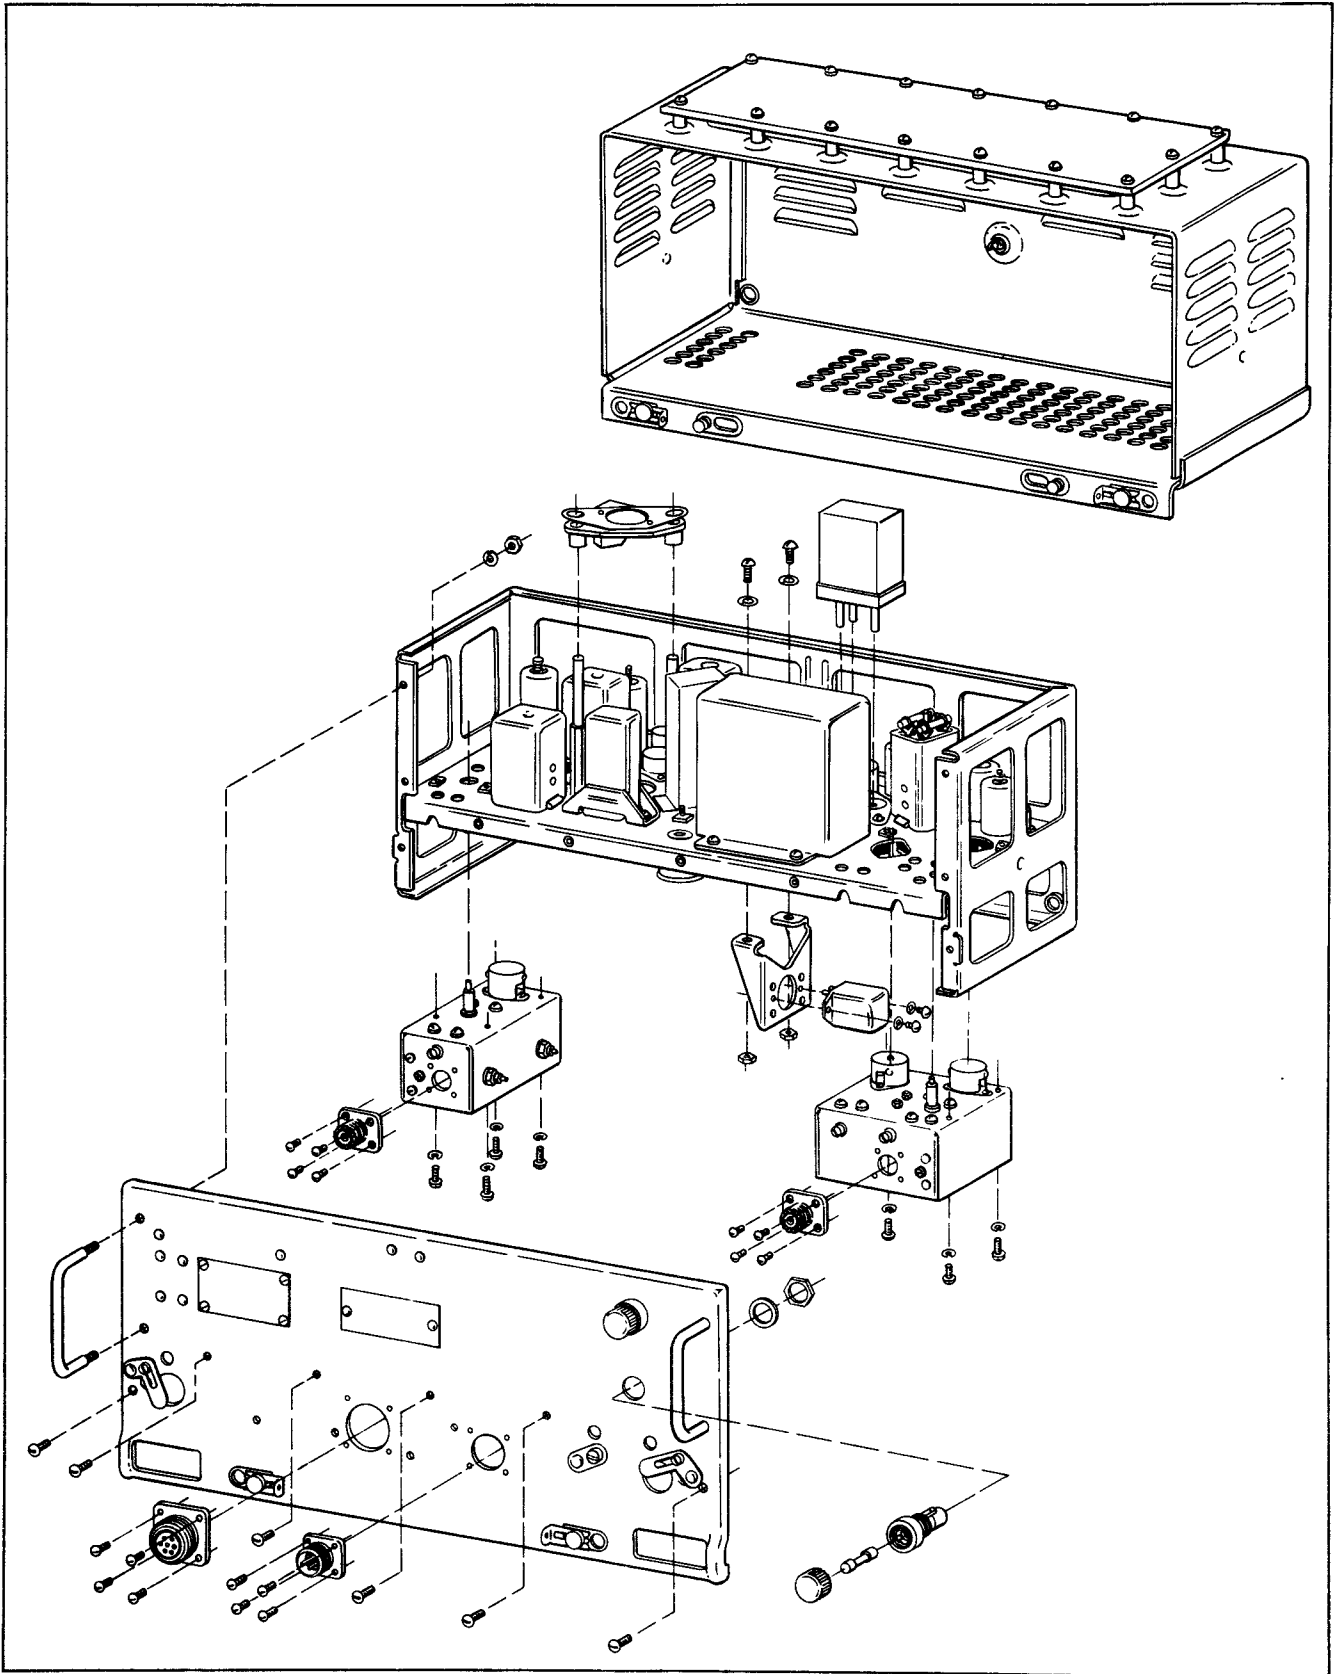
Radio Receiver and Transmitter BC-788-D, Exploded View
